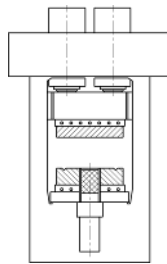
Transfer moulding machine shown with separate cylinder and with moulding material in transfer cavity
